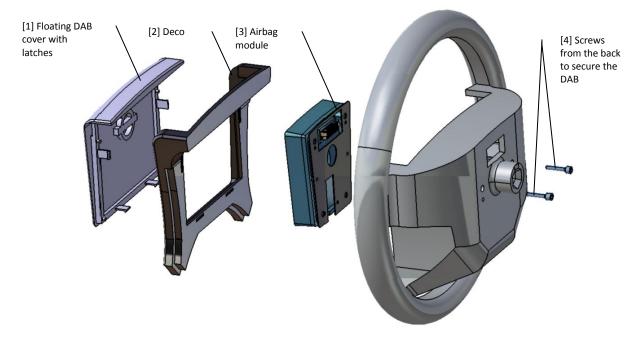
System-concept 21, CAD illustration of the assembly of the steering wheel, DAB, deco and DAB-Cover.
